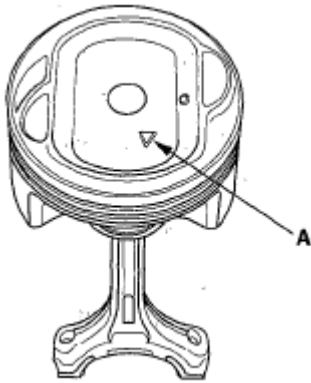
Locating Piston/Connecting Rod Assembly Arrow
